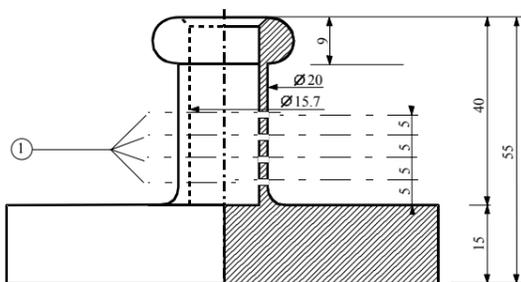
Hollow bronze cylinder, closed at one Plan and cut dimensions in
